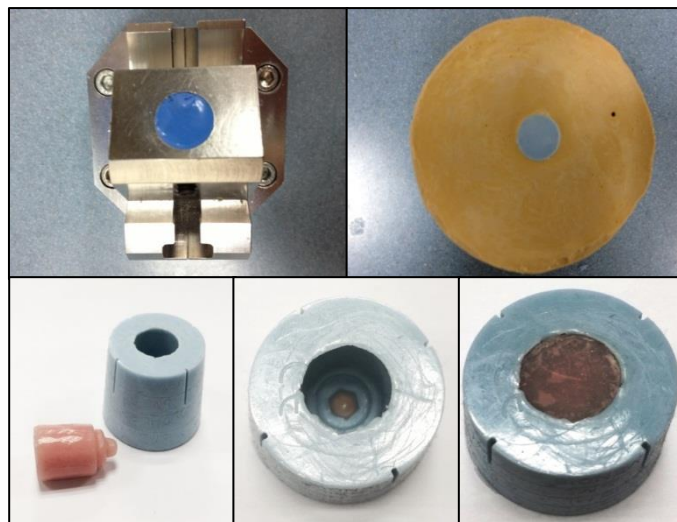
Reproduction of internal surface of the bottom fixture (sample holder) used in dynamic fatigue test.
